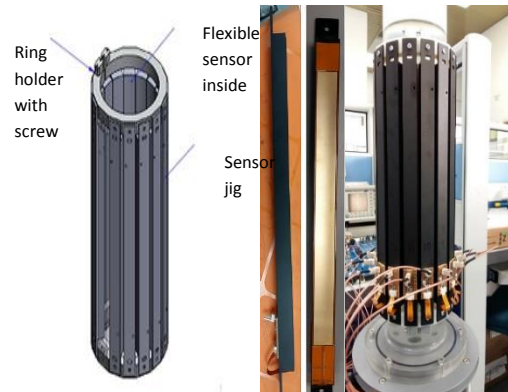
From left: A ring holder with sensor jigs, example of sensor jig from side and inner view, sensor jig attached to vertical pipe
